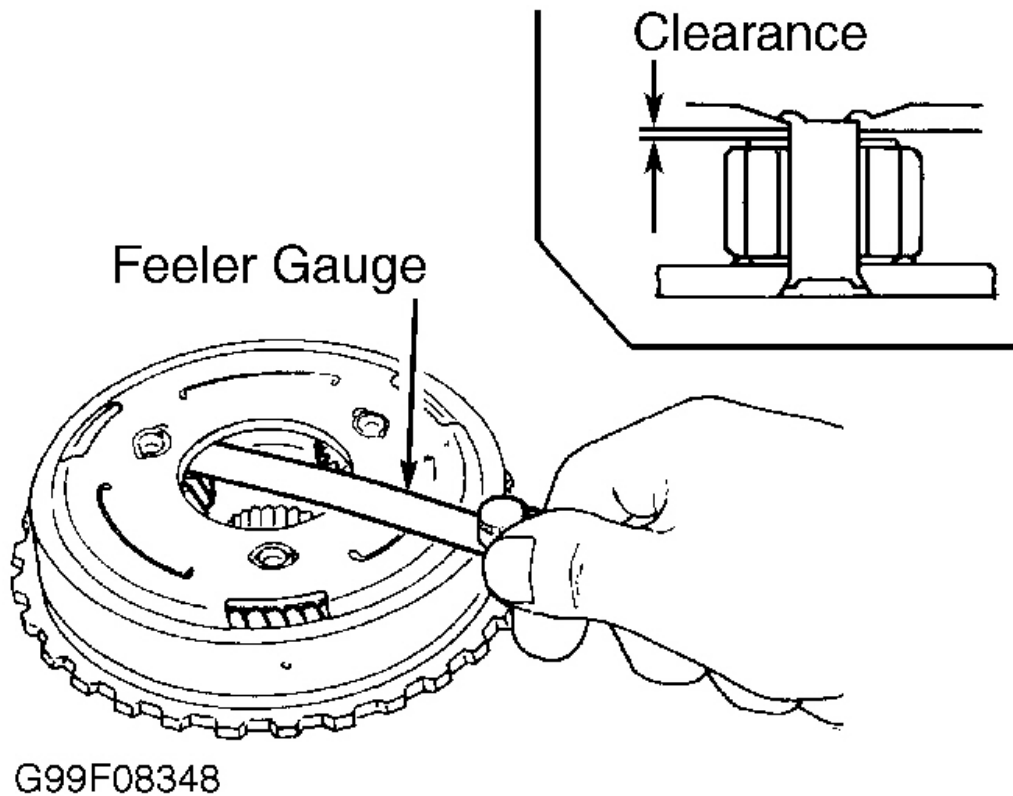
Measuring Pinion Gear Clearance (Typical)
